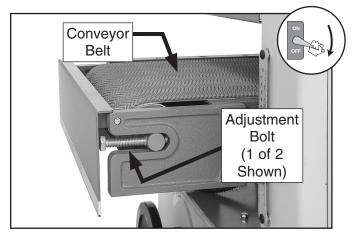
Location of conveyor belt adjustment bolts (1 of 2 shown).
